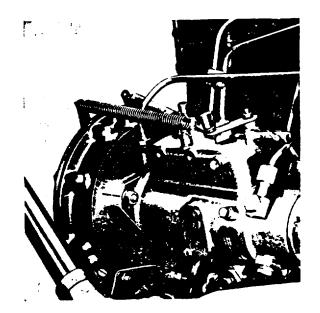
Timing Marks on Fuel Pump Flange and Timing Case.
